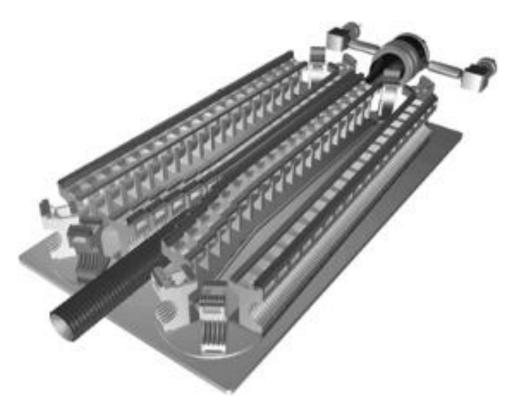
CORRUGATION PROCESS INVOLVING ALUMINIUM MOULD BLOCKS MOUNTED ON A CARRIER SYSTEM
